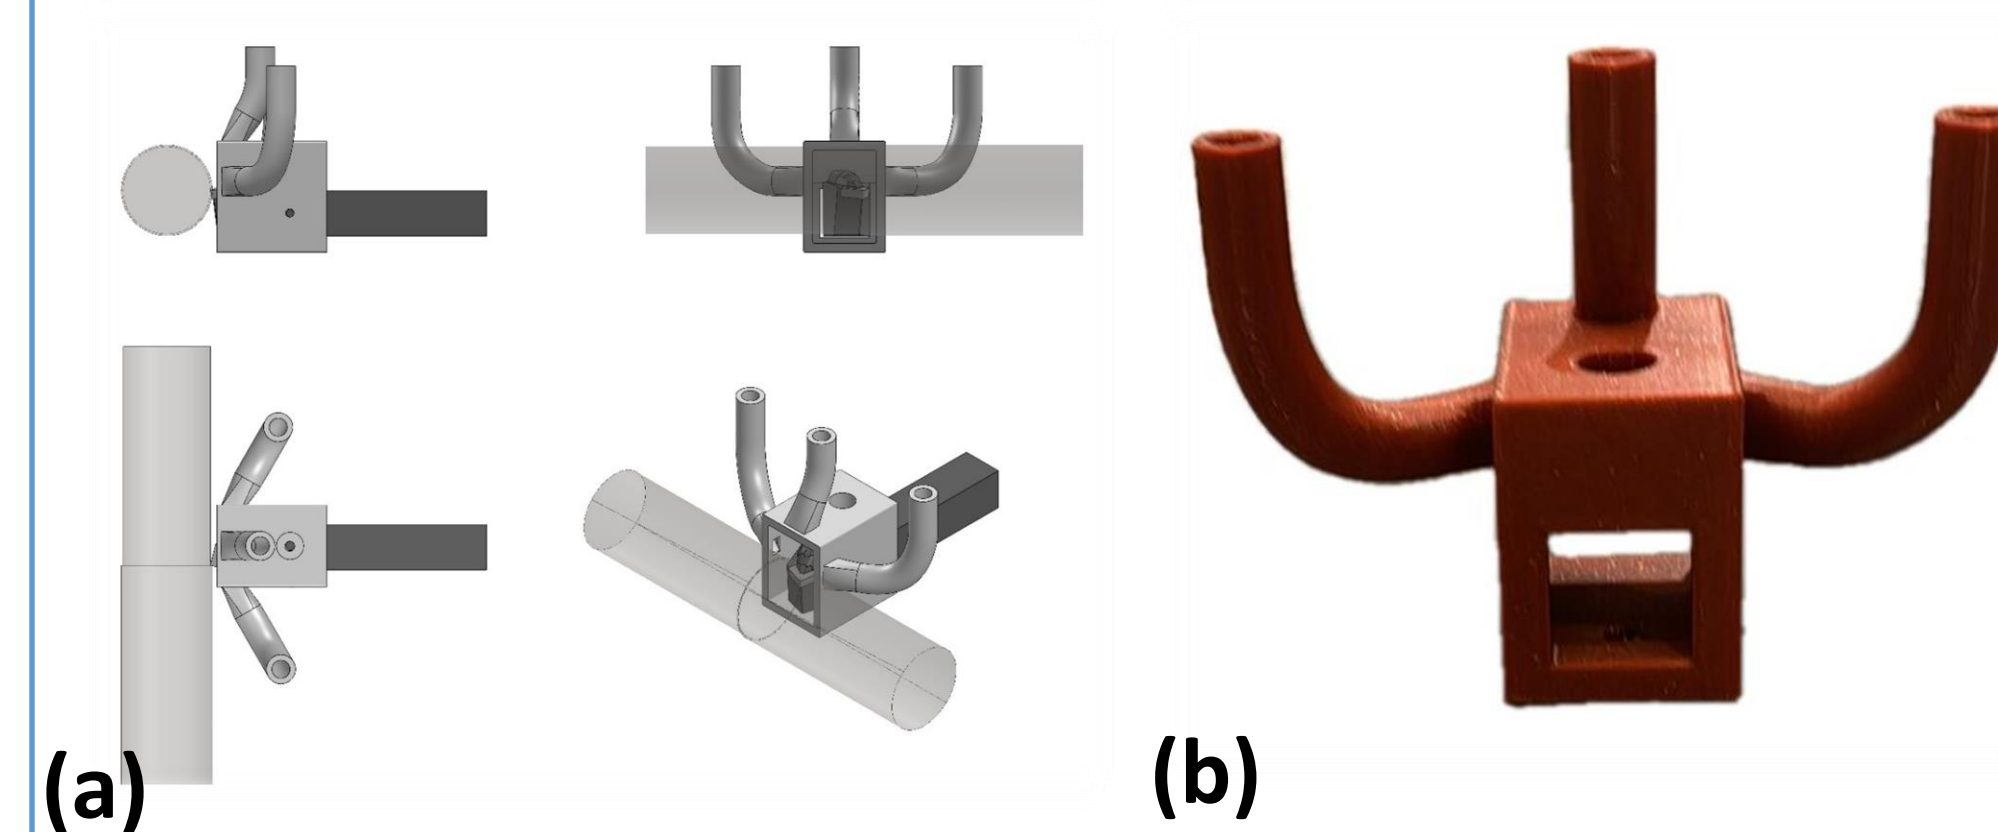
(a) 3D model, and (b) 3D printed higher pressure nozzle
